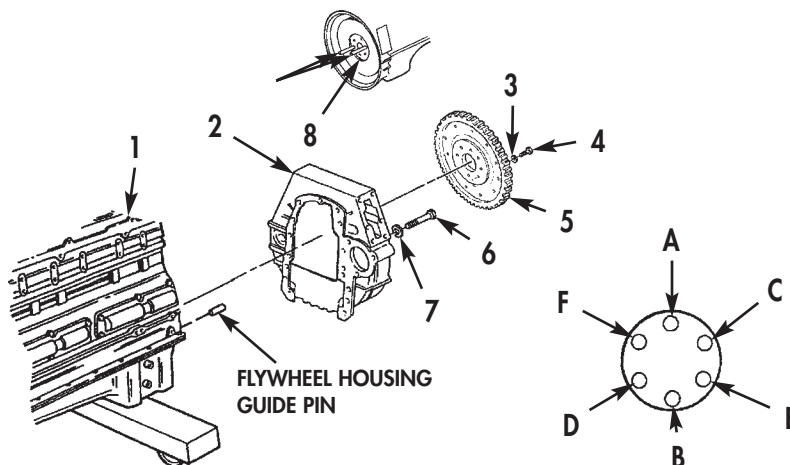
Big Cam I Flywheel Housing and Flywheel Installation.
